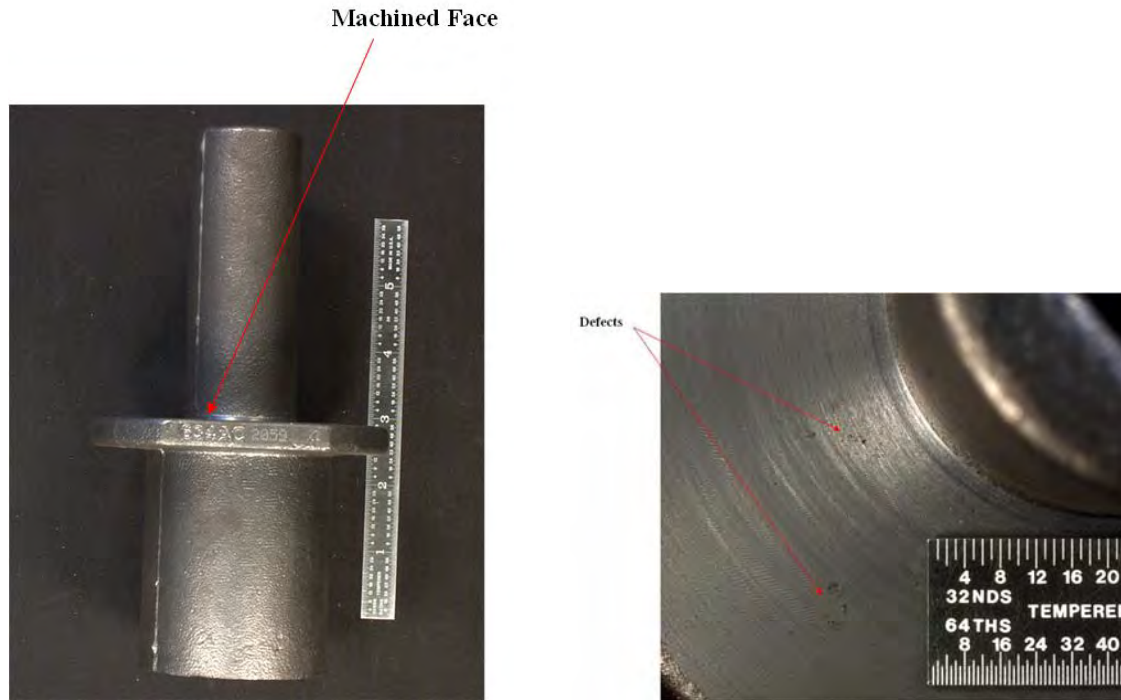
Subsurface Defects in a Ductile Iron Clutch Housing
